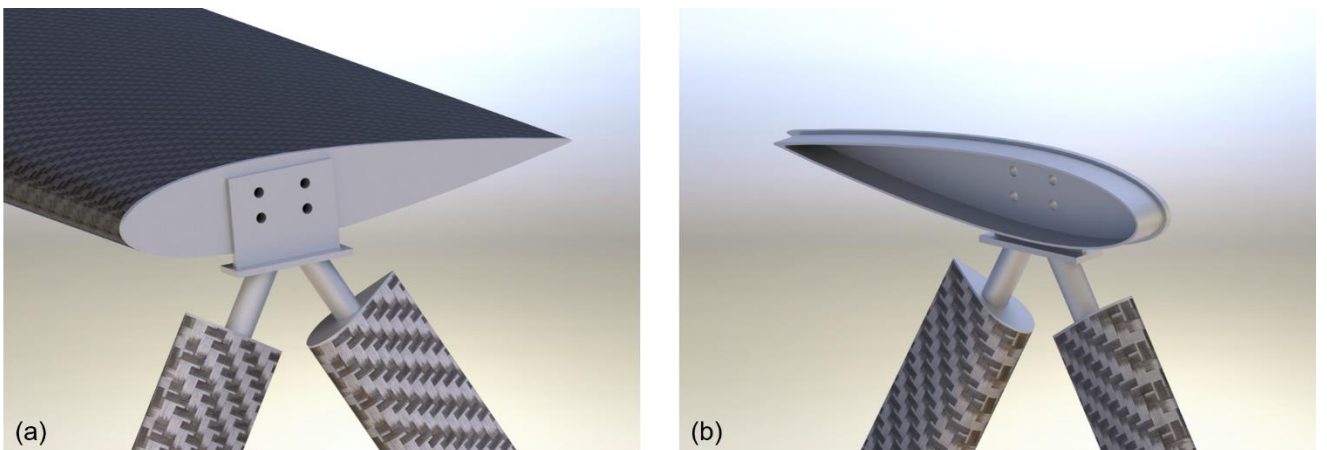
Blade support and blade cover inserts (a); interior view of the blade cover (b)
